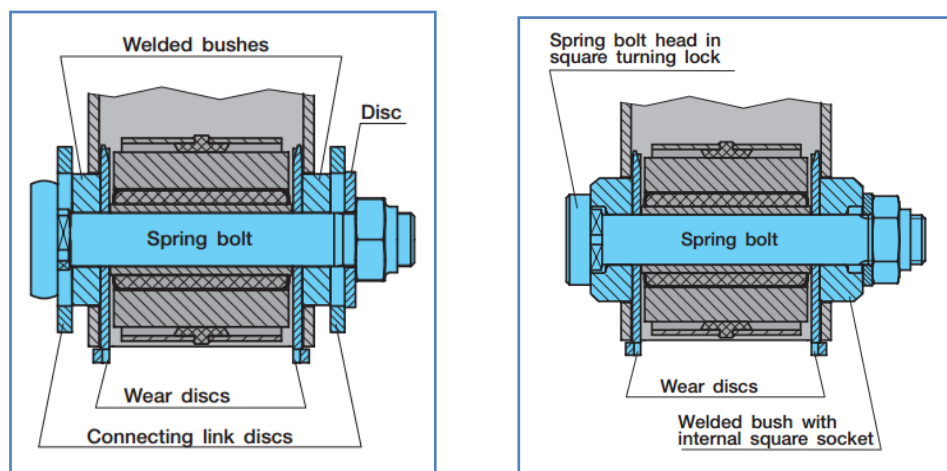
Adjustable hanger bracket pivot bolt assembly (Left) and Fixed hanger bracket pivot bolt assembly (Right)
